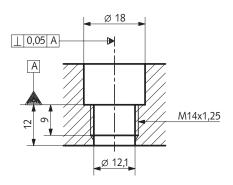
Fitted into combustion chamber with hole ø18 mm, seal Type 1111A, diaphragm flush mounted with the combustion chamber
